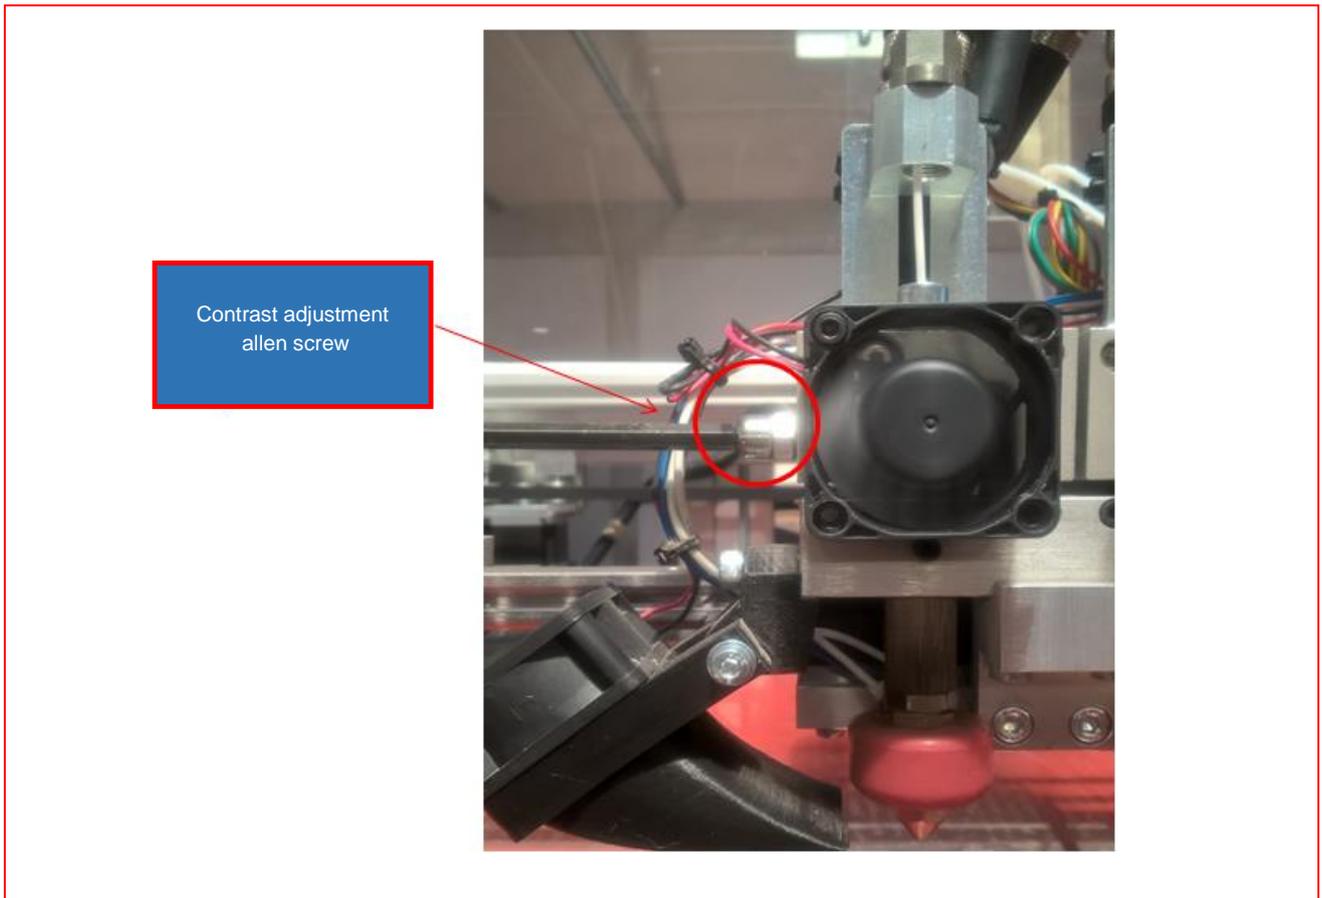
Allen screw for adjusting feeder assembly contrast
